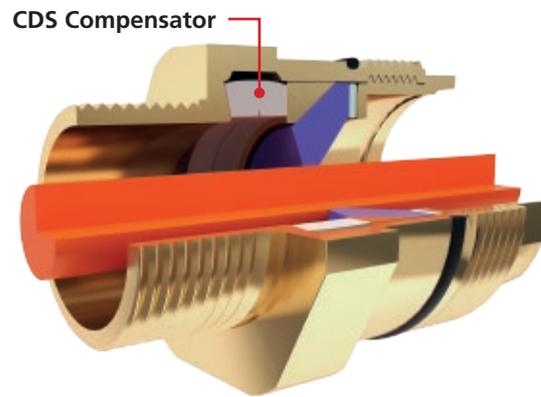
When a smaller diameter cable is installed the inner compensator operates to a lesser extent.
